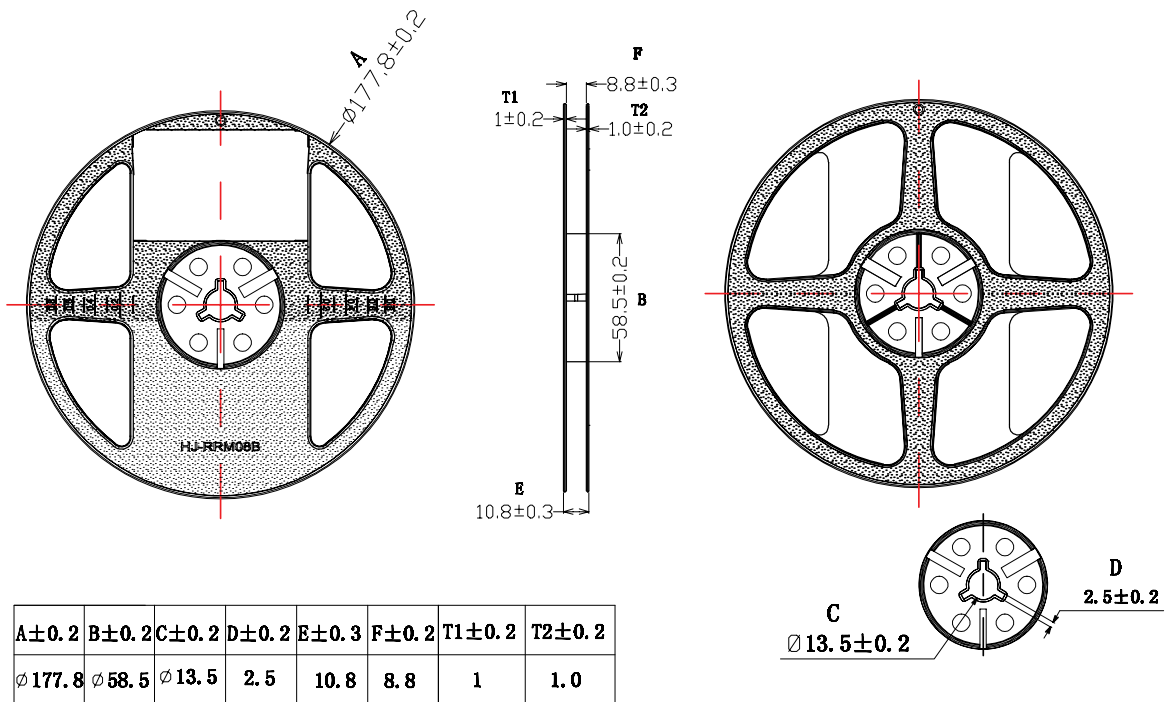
Reel dimensions for LUXEON 2835 Color Line.
